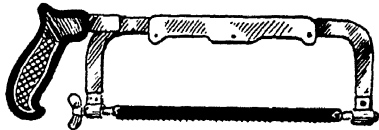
Adjustable hack-saw frame with "pistol-grip" handle
